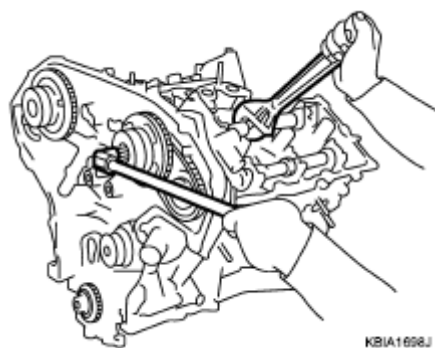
Tightening Camshaft Sprocket Mounting Bolts
